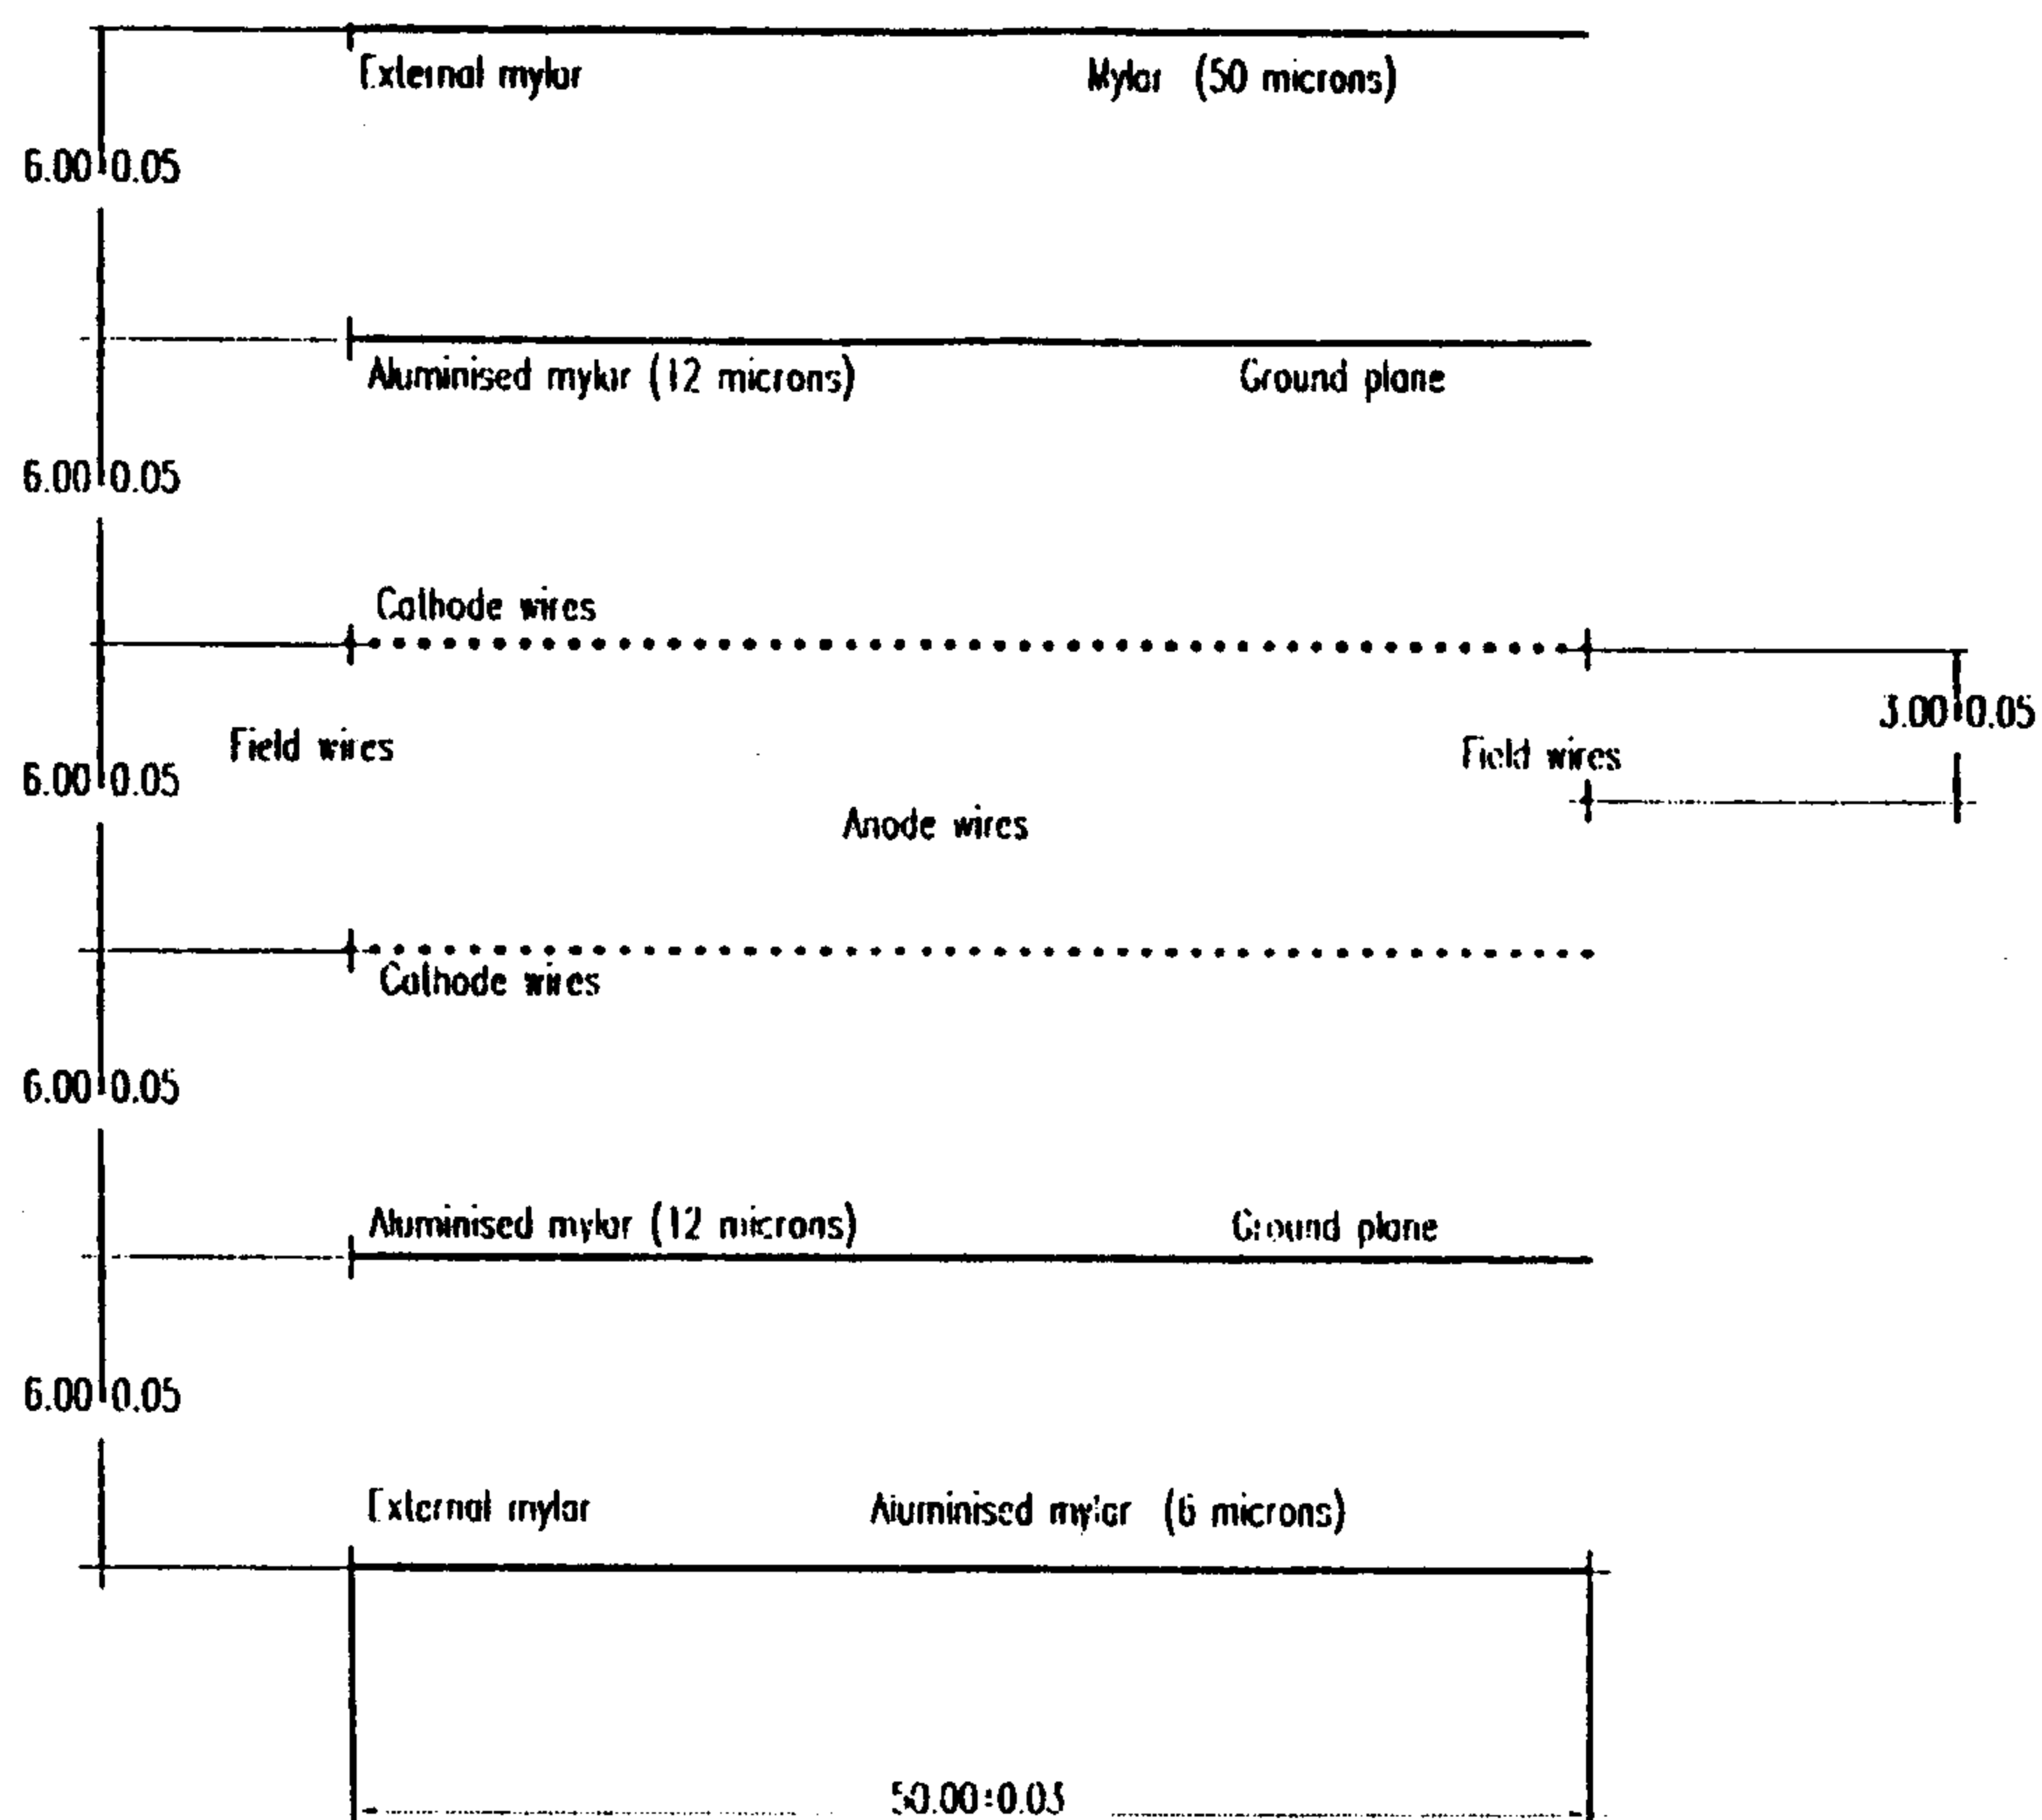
Drift chamber cell layout with dimensions and mechanical tolerances.
